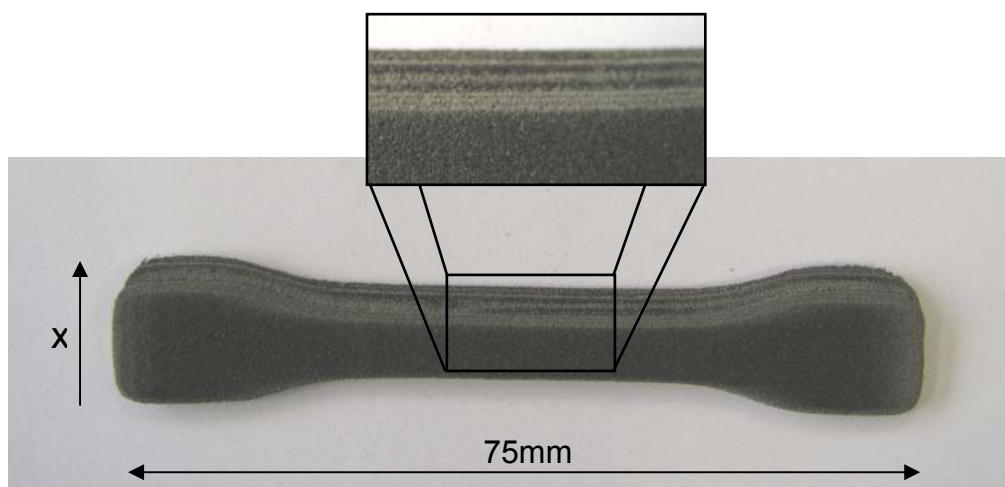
Tensile test piece created on the Vanguard SLS machine using a mask with a tensile test shape
